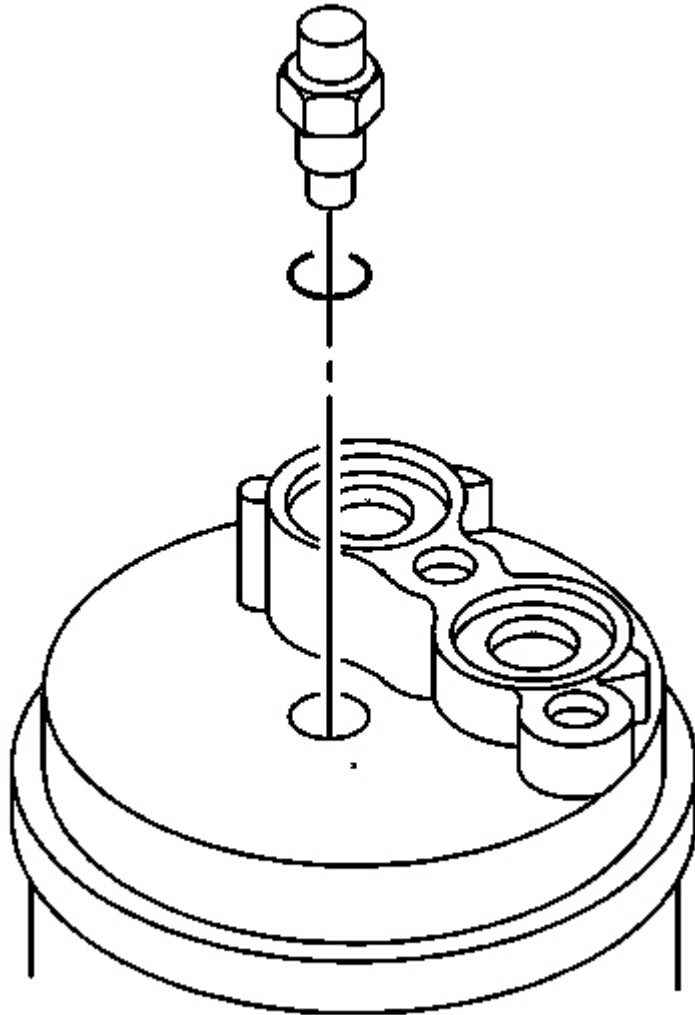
Rear Head A/C Compressor & Pressure Relief Valve
